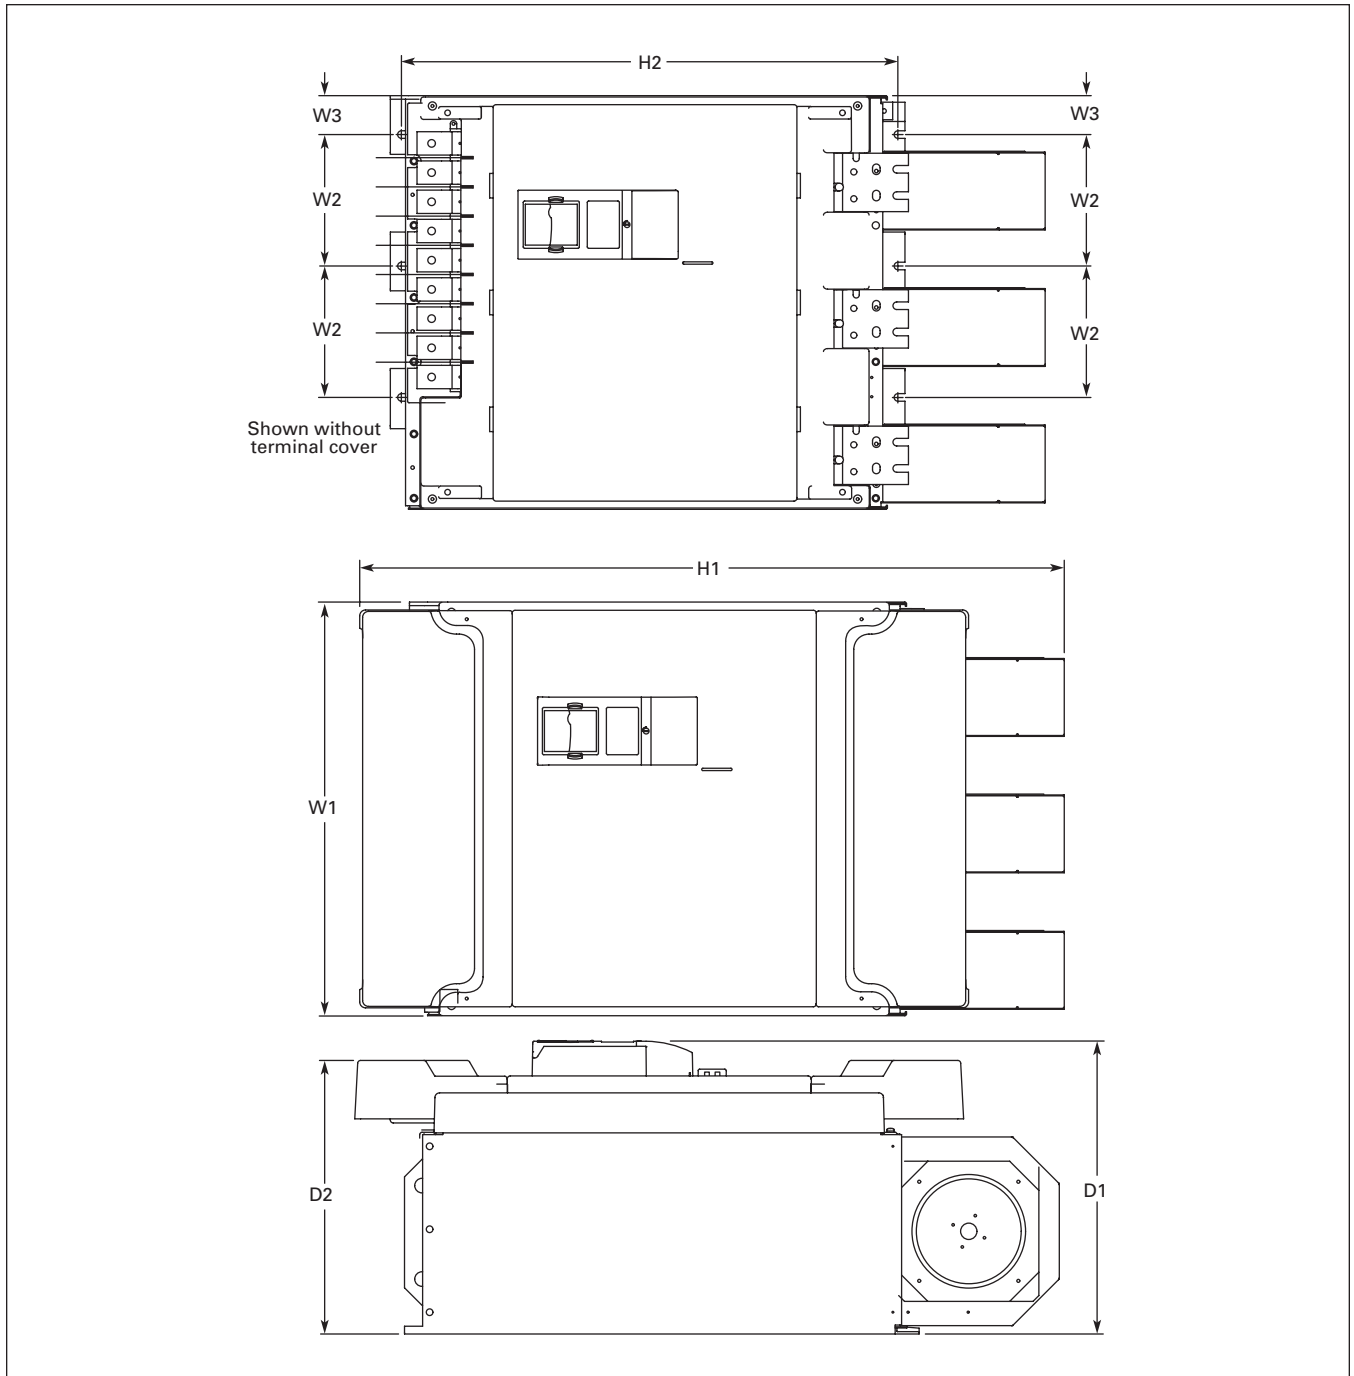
HVX9000 Dimensions, FR11 Open Chassis
